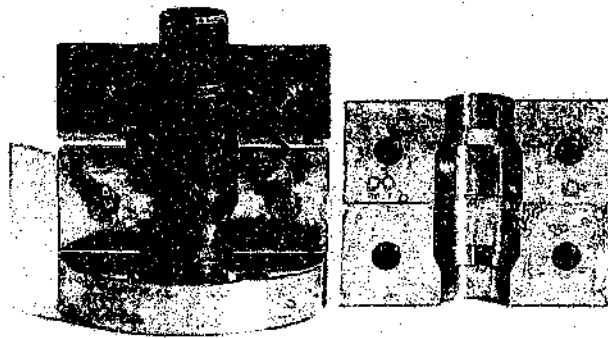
$\varnothing 24mm$ cylindrical die with a deformed mild steel tube, 1.6 mm wall thickness after impact of a shock wave with $P_{max} = 66.4 MPa$, $I = 122.2 Ns$, $E = 3113.23 J$
